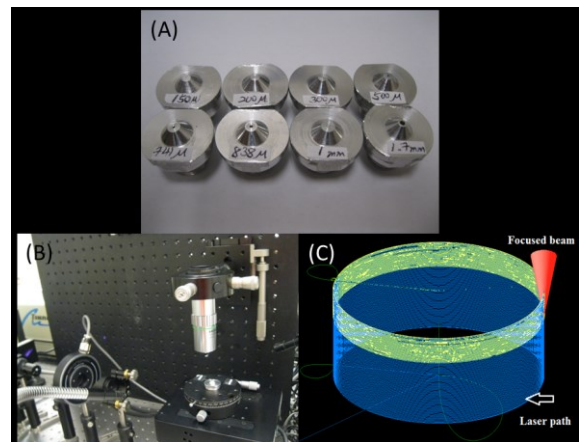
(A) completed machined nozzles (B) Femtosecond laser system setup consists of microscope objective lens, 4-axis translation stage, and shutter, (C) Helical tool path generated using GOL3D to drill a hole at center of the surface on the machined nozzle
